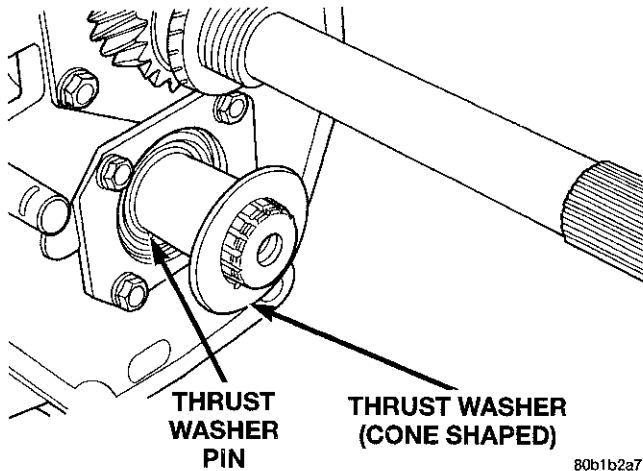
Countershaft Rear Bearing Thrust Washer Removal
